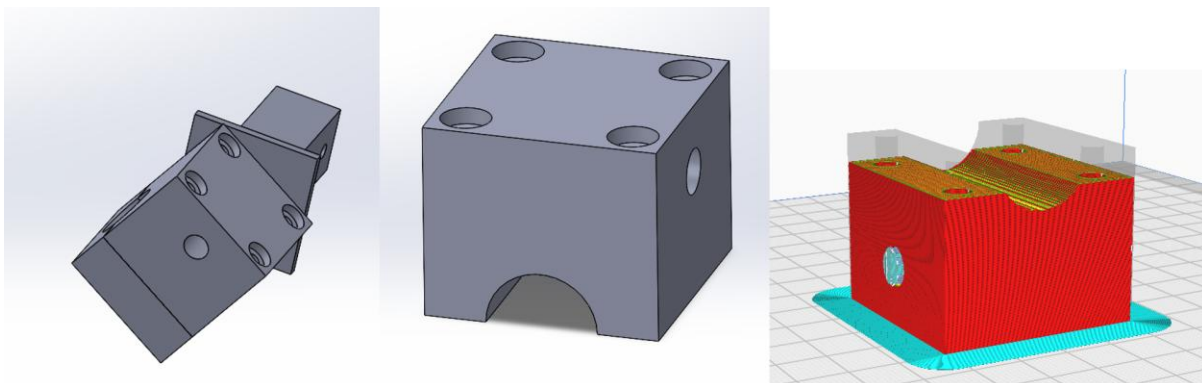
Final assembly and detail with SolidWorks. Print simulation with Ender Software.
